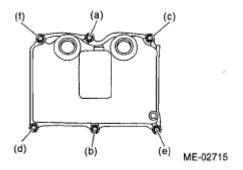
Identifying Rocker Cover Bolts - RH Side Courtesy of SUBARU OF AMERICA, INC.
